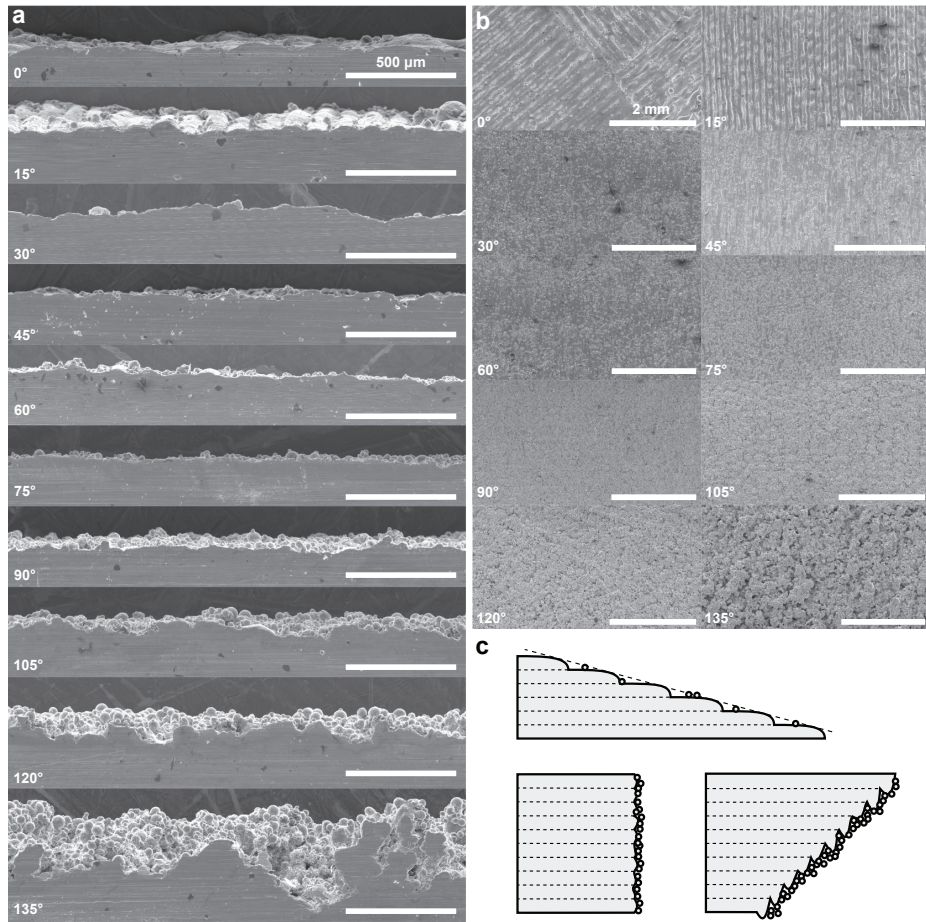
SEM of surface conditions of specimens. (a) machined cross section (b) as-built surface (c) Schematic illustration of the different surface conditions
